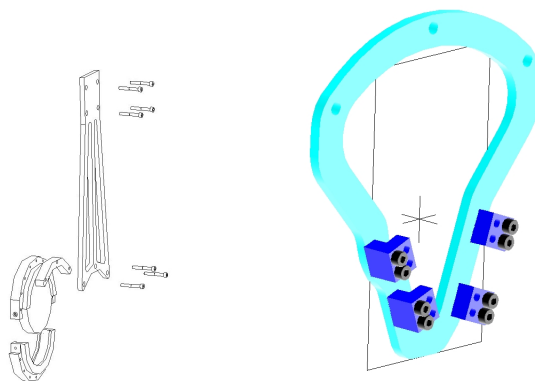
Drawing of for gilded bronze Ghiberti Heads supports: Head 1 (left), Head 2 (right).
